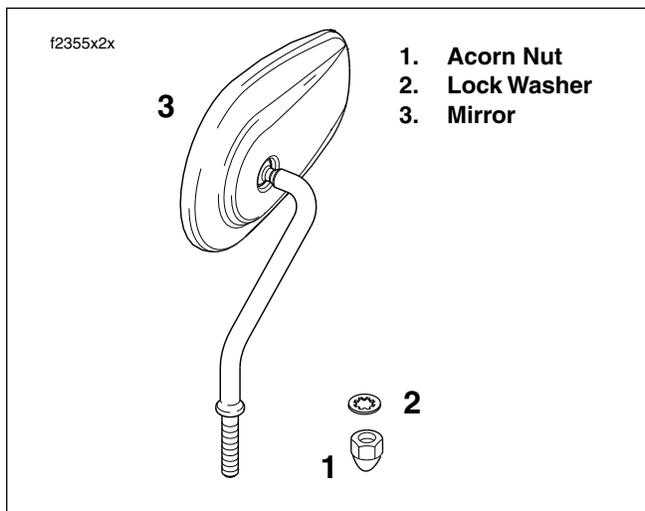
Mirror Assembly (All Models Except FLHX)
